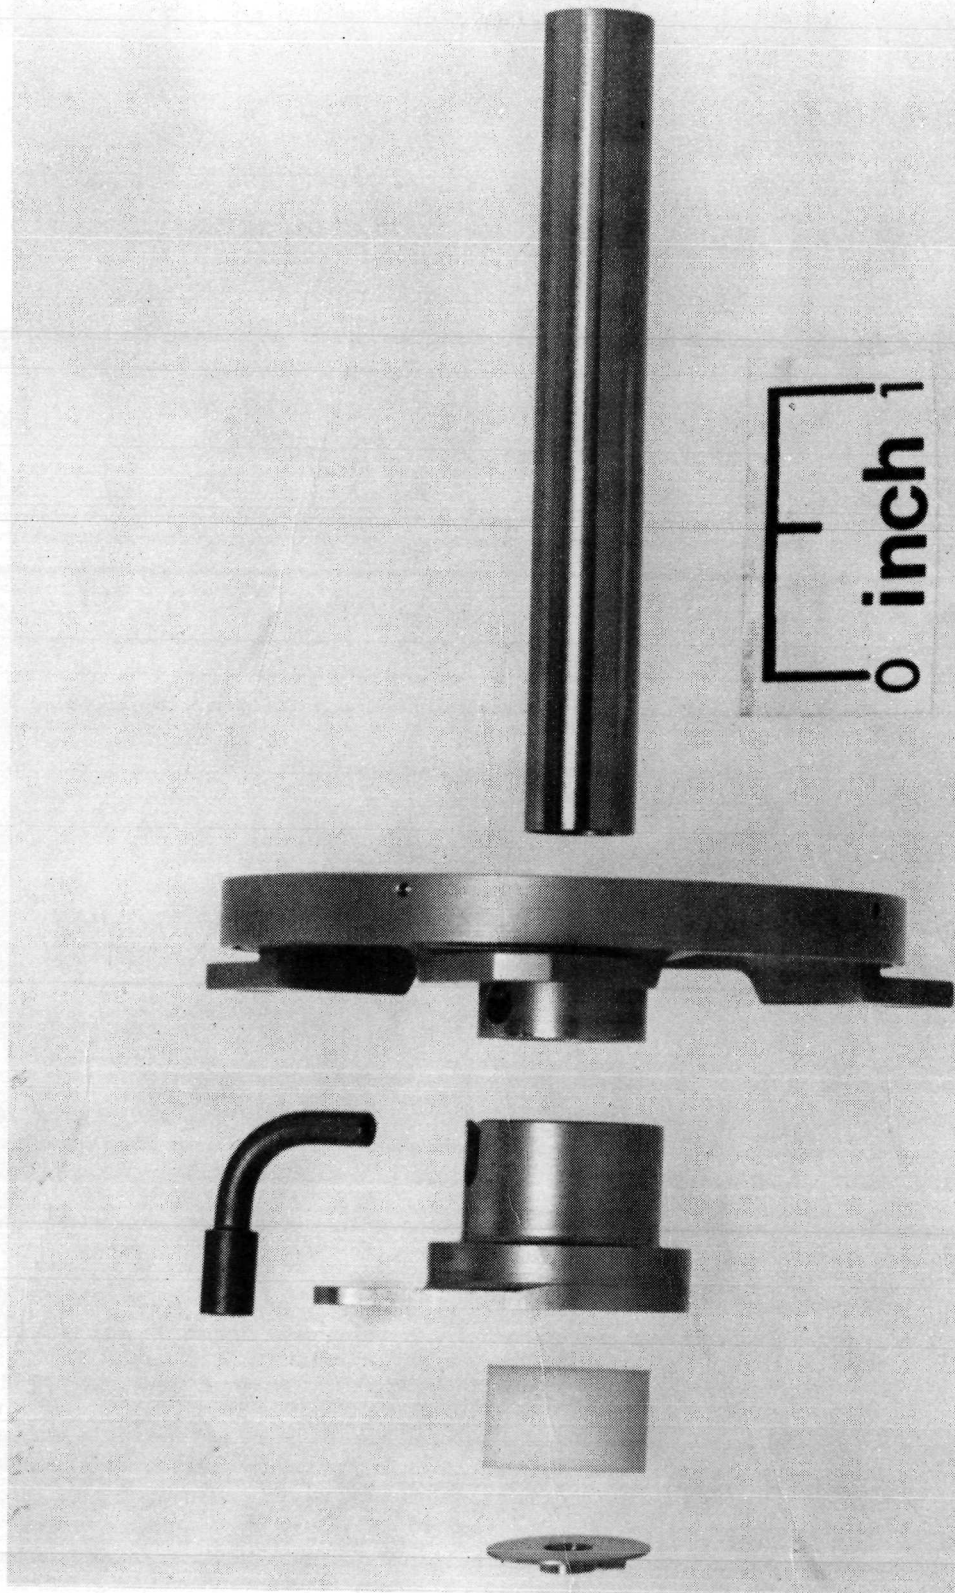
EXPLODED ASSEMBLY OF S/N 003 RUGGEDIZED RESISTOJET 21
